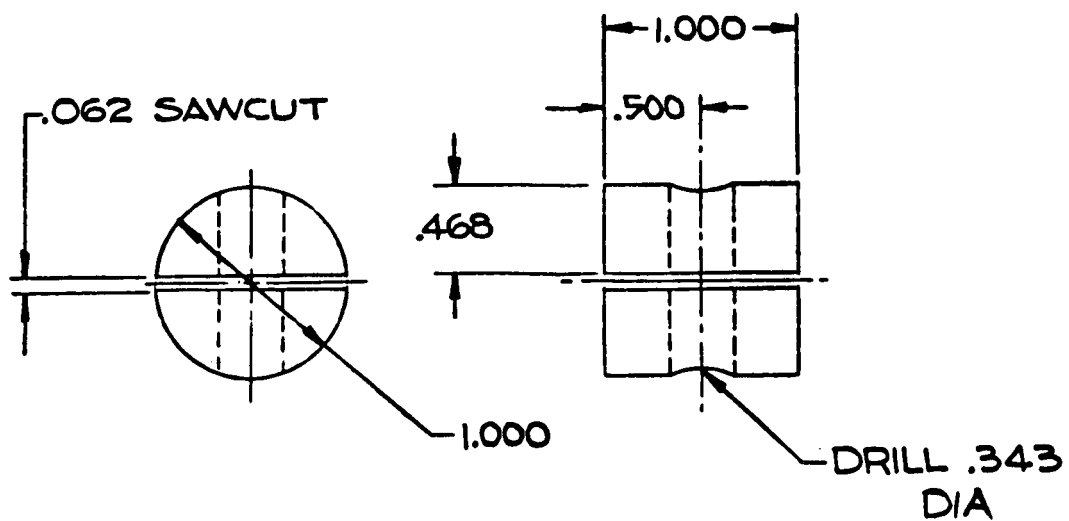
C. ROCKER FOR BENT BEAM STRESS CORROSION ASSEMBLY
